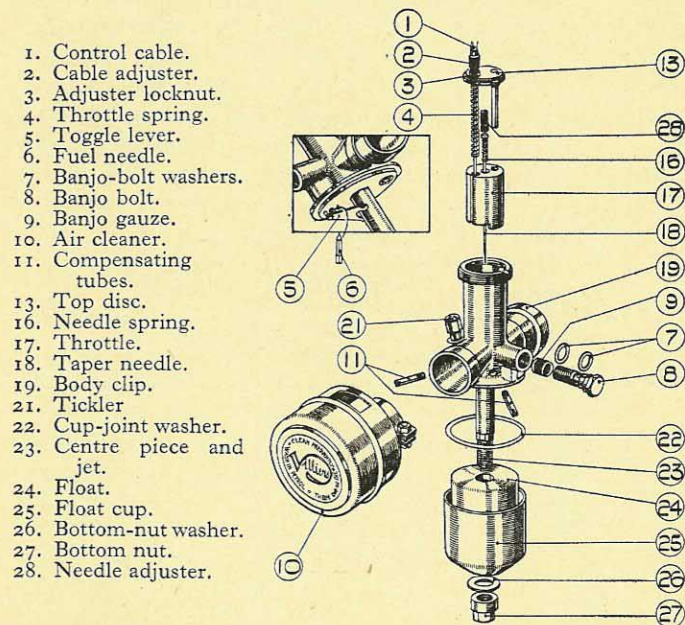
EXPLODED DRAWING OF TYPE 3/4 CARBURETTER, MARK 10D UNIT.
